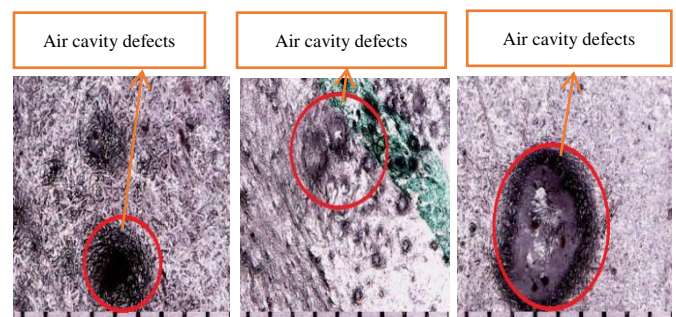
Pouring at temperature 690°C (a) air cavity defects (b) air cavity defects. (c) pinhole defects
